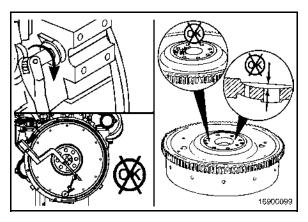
REMOVE THE FLYWHEEL AND INSPECT BETWEEN THE FLYWHEEL MOUNTING SERVICE AND CRANKSHAFT FLANGE
